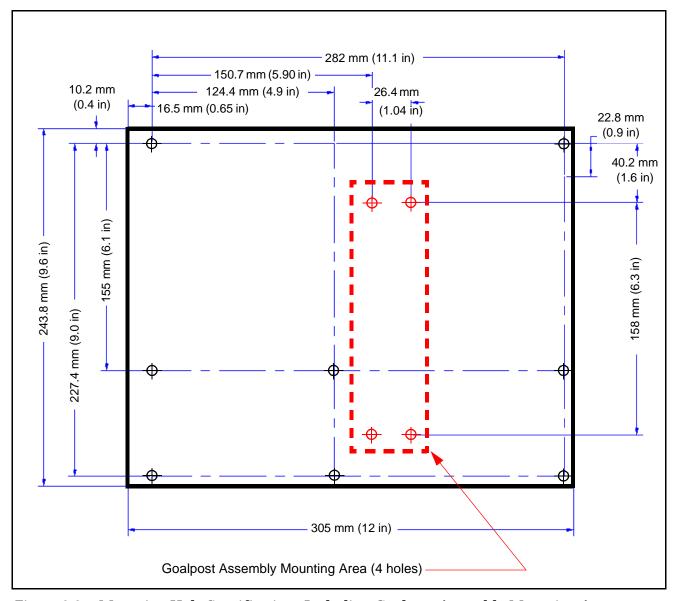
Mounting Hole Specifications Including Goalpost Assembly Mounting Area
